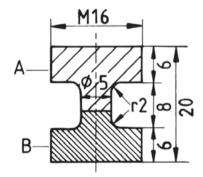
Geometry of the welded sample for the microtensile experiment
